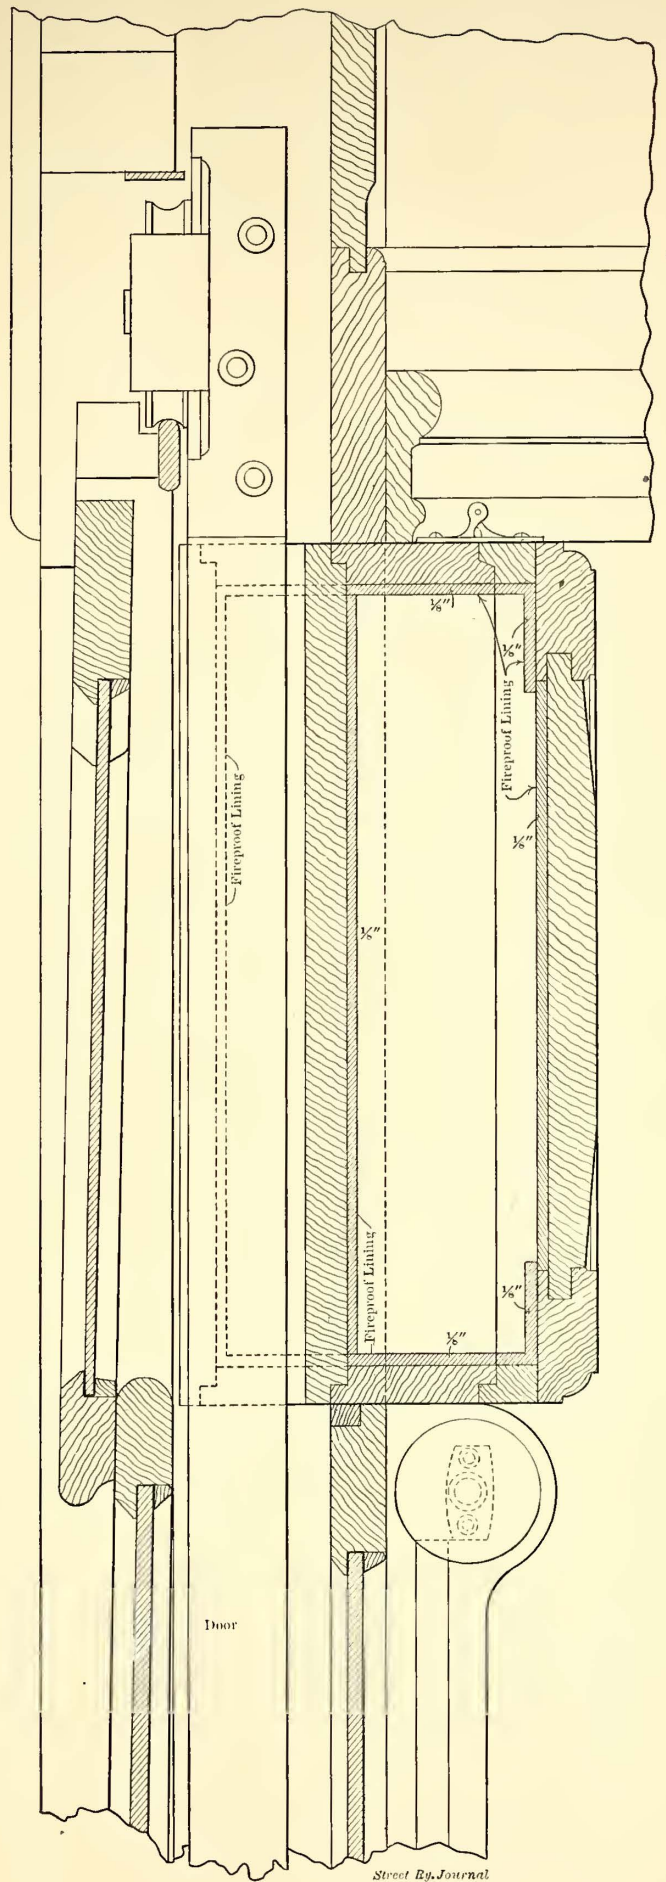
SECTION SHOWING LOCATION OF SWITCH CABINET, WIRING SCHEME FOR WASHINGTON CAR
